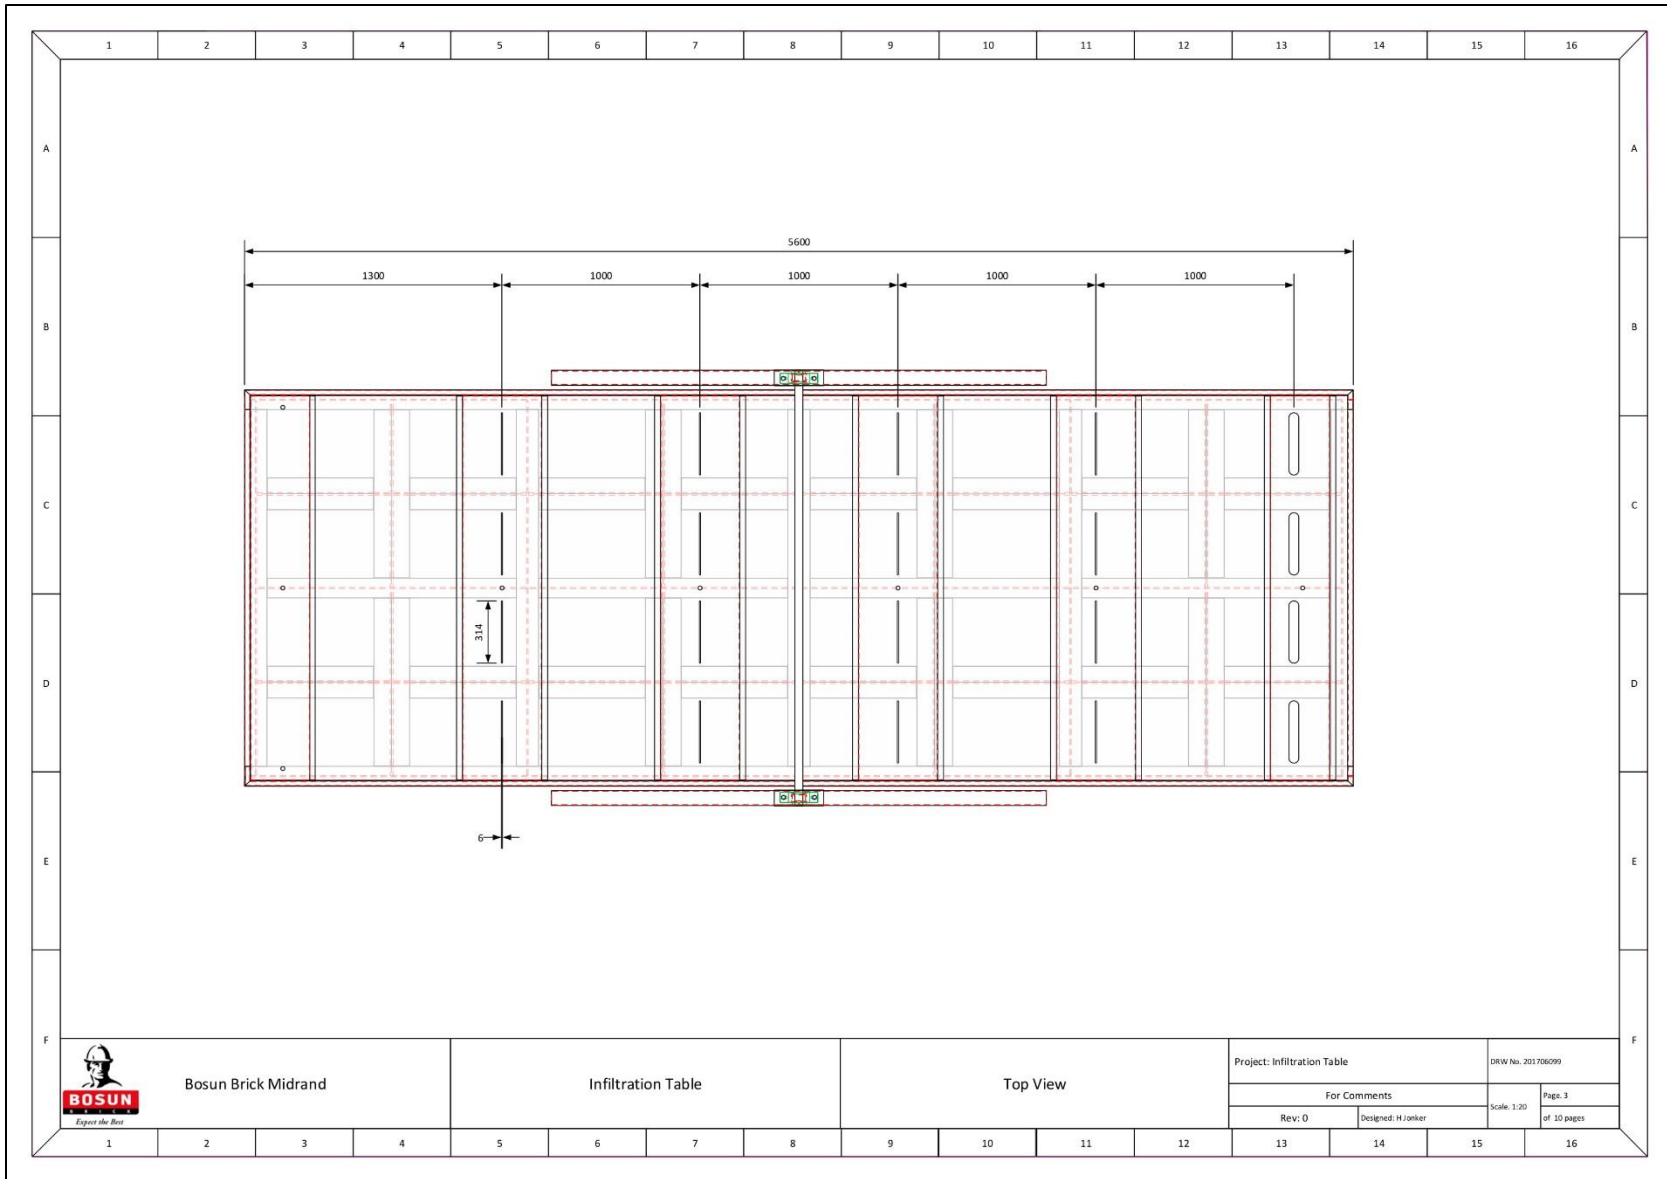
The top view of the Infiltration Table Apparatus design drawing. (Bosun Midrand, 2017)
